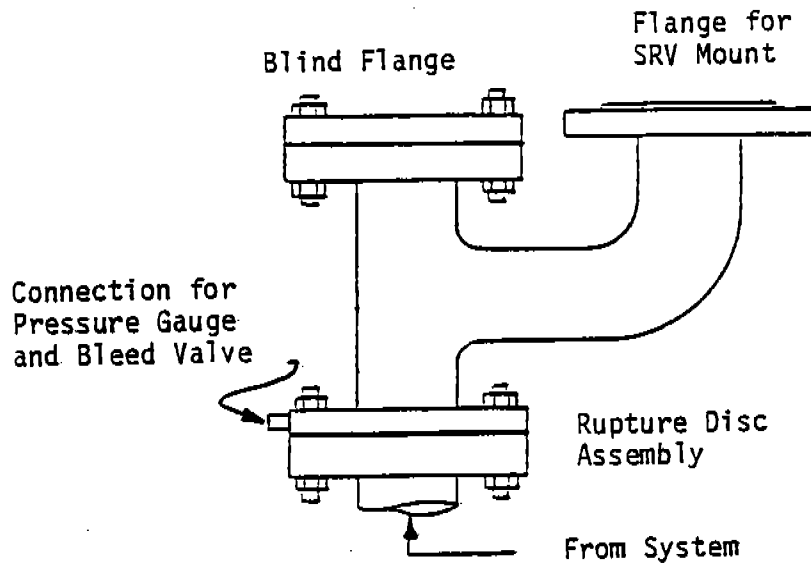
Relief Valve/Rupture Disk Assembly.
